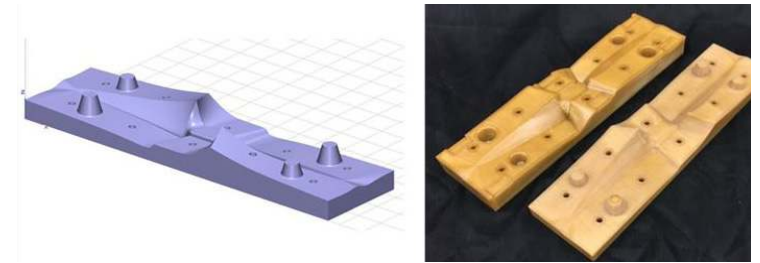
Propeller compression molding tool: horizontal build orientation (left), matched mold halves (right).
